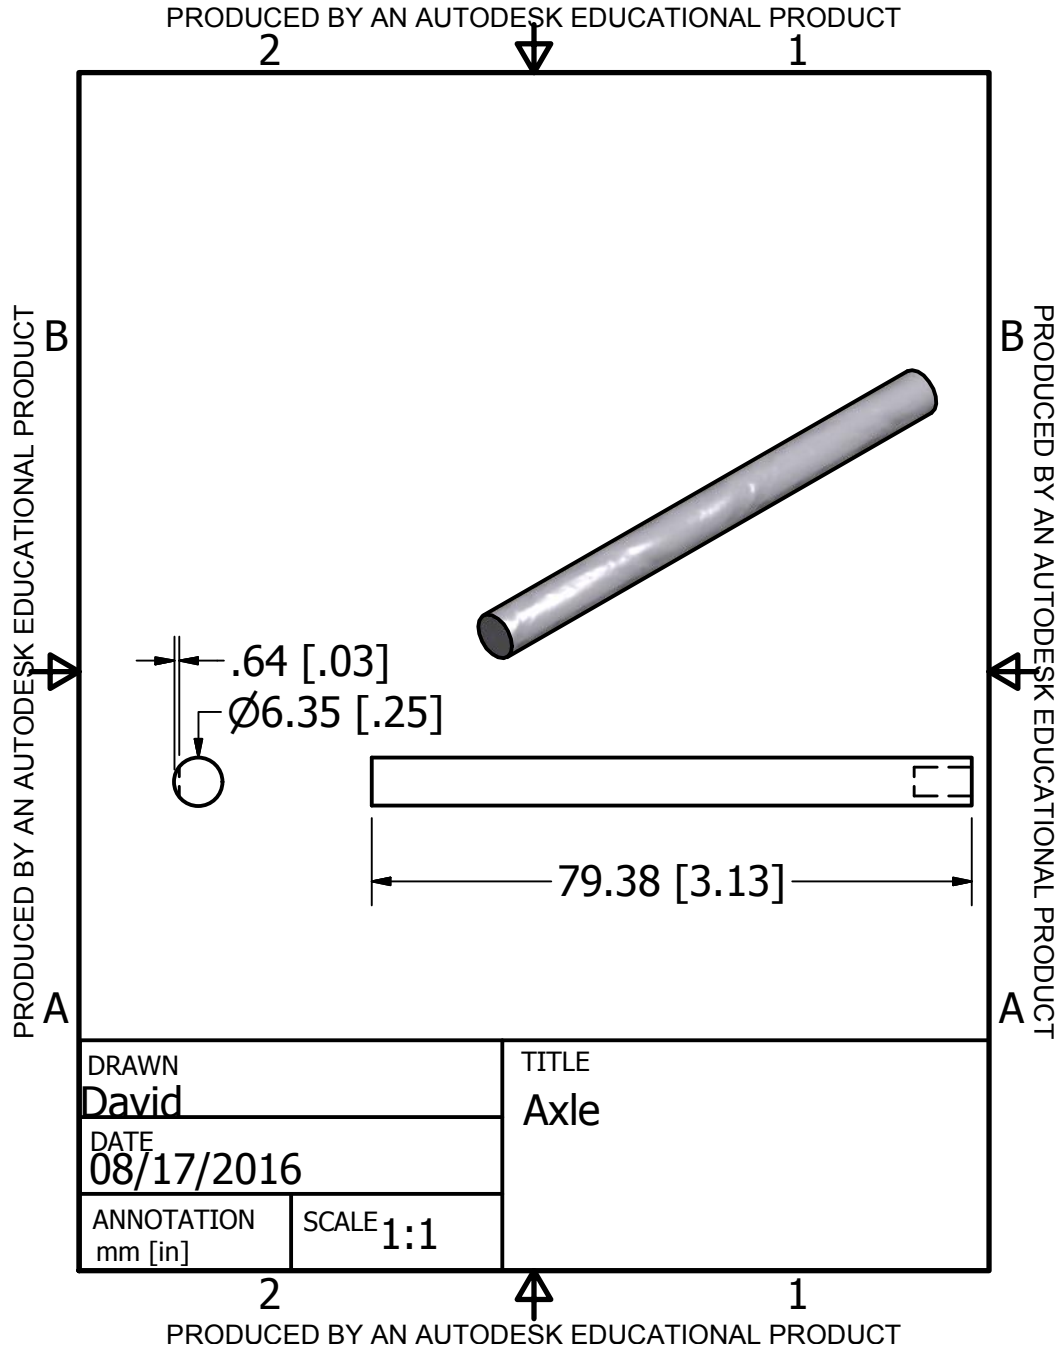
Mechanical drawing for the electronics wheel axle. This axle provides an anchor for the motor to push against and rotate the blind unit. A flat is added using a file.
